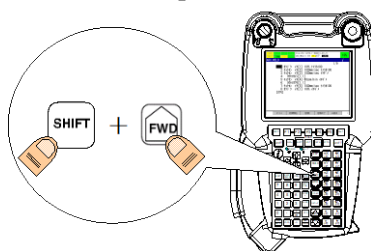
(c) Continuous Operation of Weld Program
